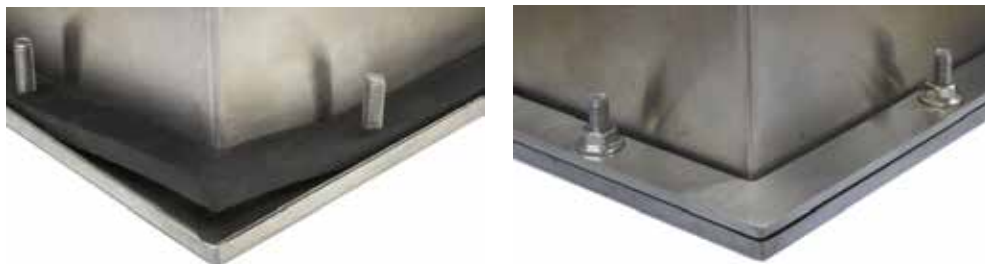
Gasket on Enclosure (left) and Backing Plate Installed (right)
